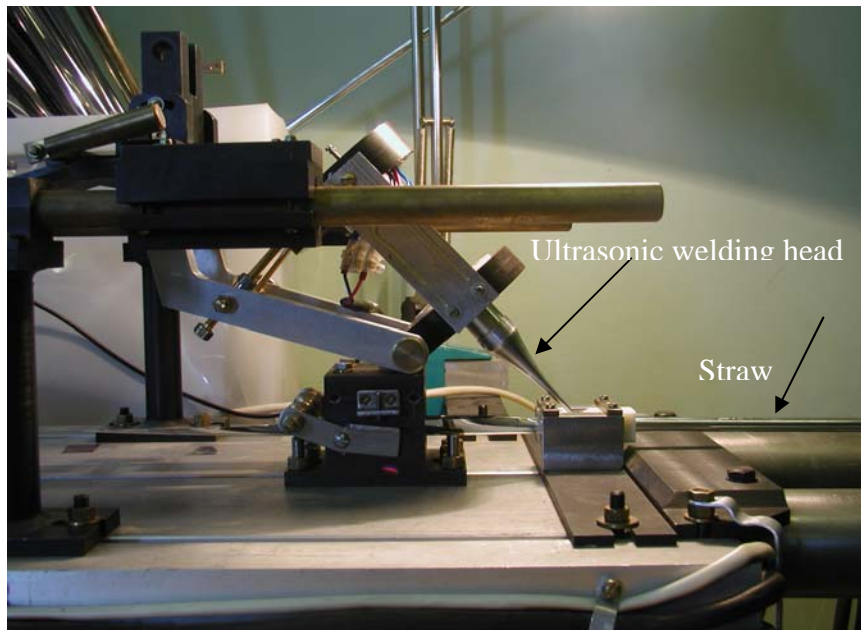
Ultrasonic welding machine for Mylar straws. The welding seam is straight and parallel to the straw axis.
